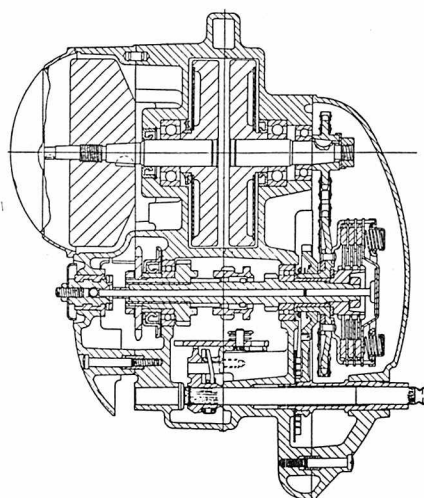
Cross sectional view of engine and transmission assembly.
